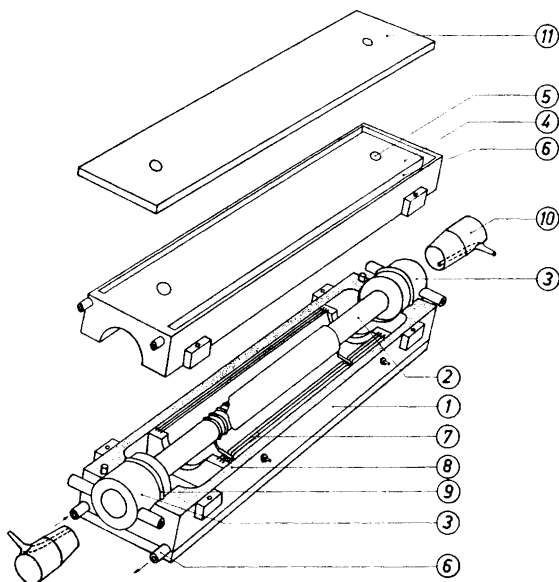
Schematic diagram of the single-zone molybdenum furnace. 1, supporting casing; 2, heating tube and Mo wire; 3, brass supports; 4, lid; 5, gas inlet; 6, cooling channel with water connection; 7, lower reflector shields; 8, rubber gasket; 9, "O" ring; 10, glass joint; 11, lid cover.
